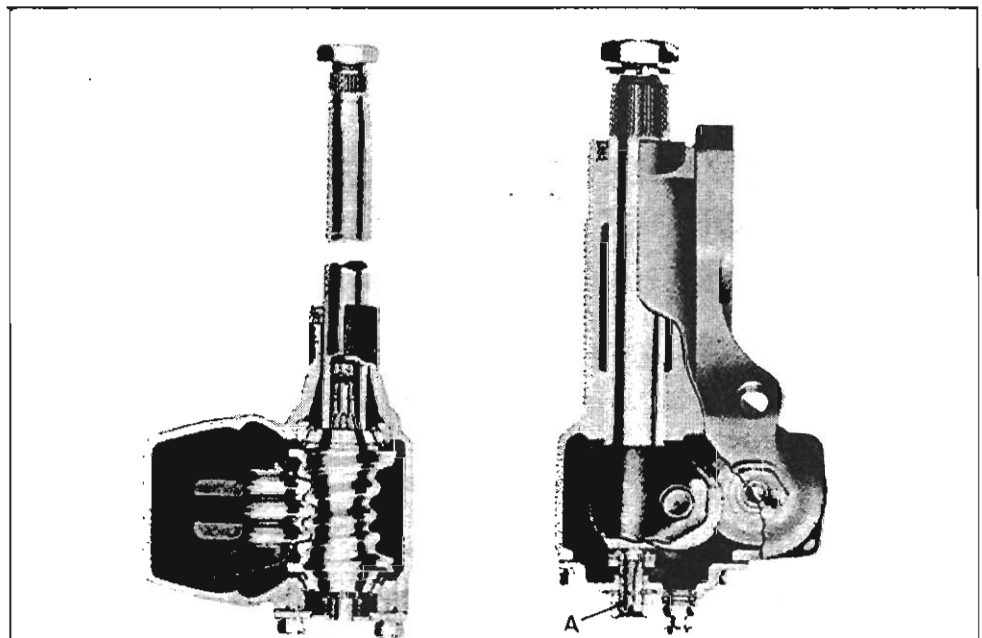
Steering Gear Assembly With Three-Tooth Roller Type Cross Shaft.
